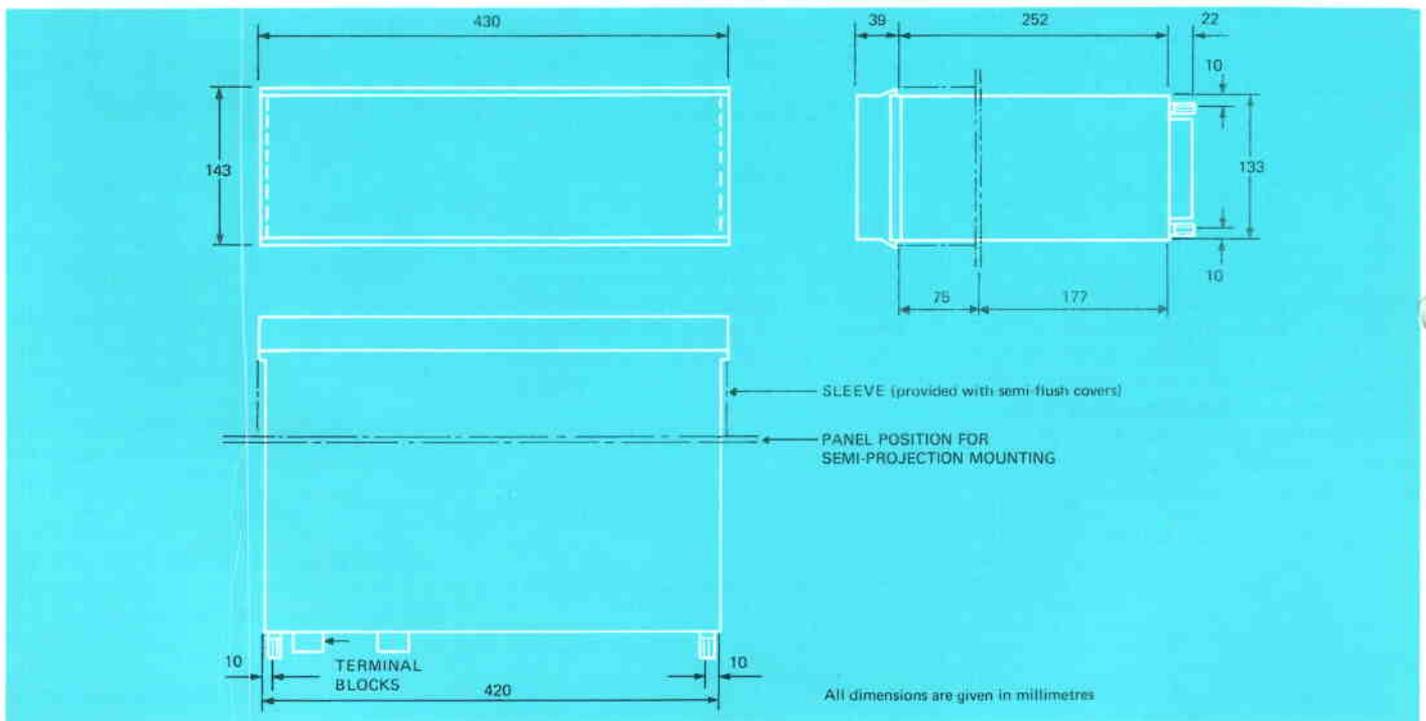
OUTLINE OF PANEL MOUNTED CASE
